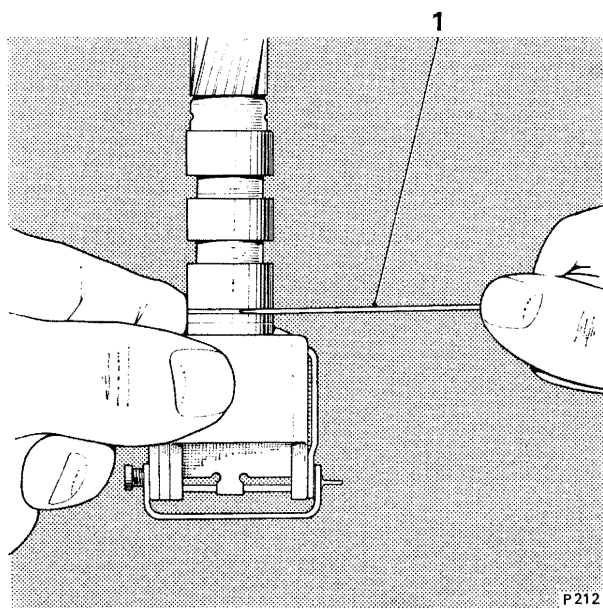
CHECK VALVE OPENING (EXHAUST)
